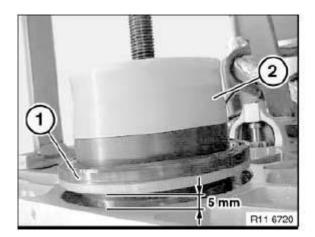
Identifying Radial Shaft Seal Position And Support Ring Courtesy of BMW OF NORTH AMERICA, INC.
